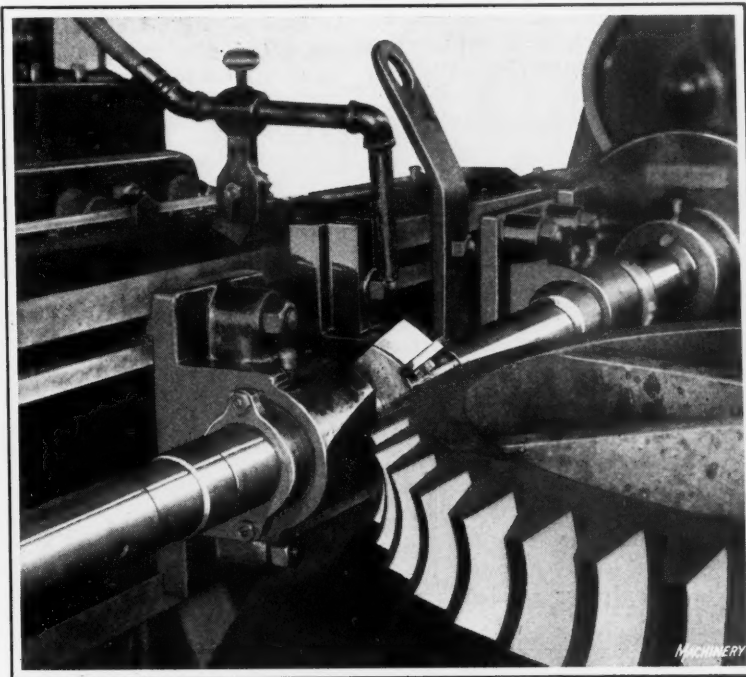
Cutting a Worm-gear by the Fly-cutter Method
